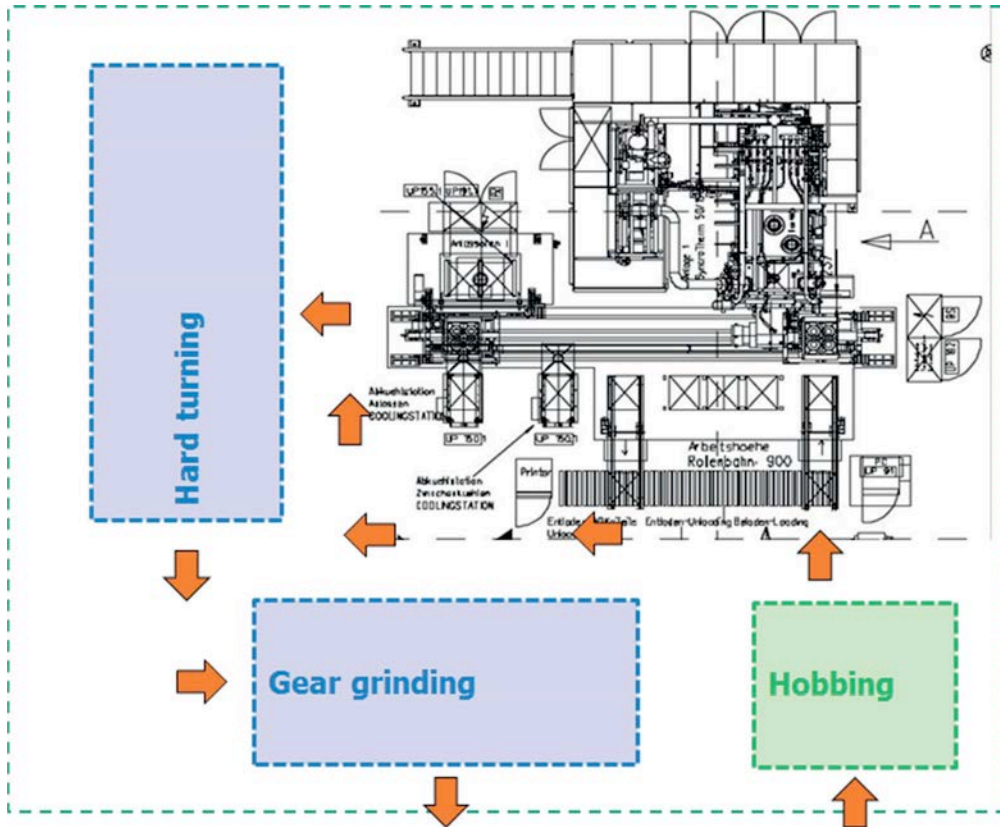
Synchronized “U-shape” manufacturing cell for final drive ring gears
